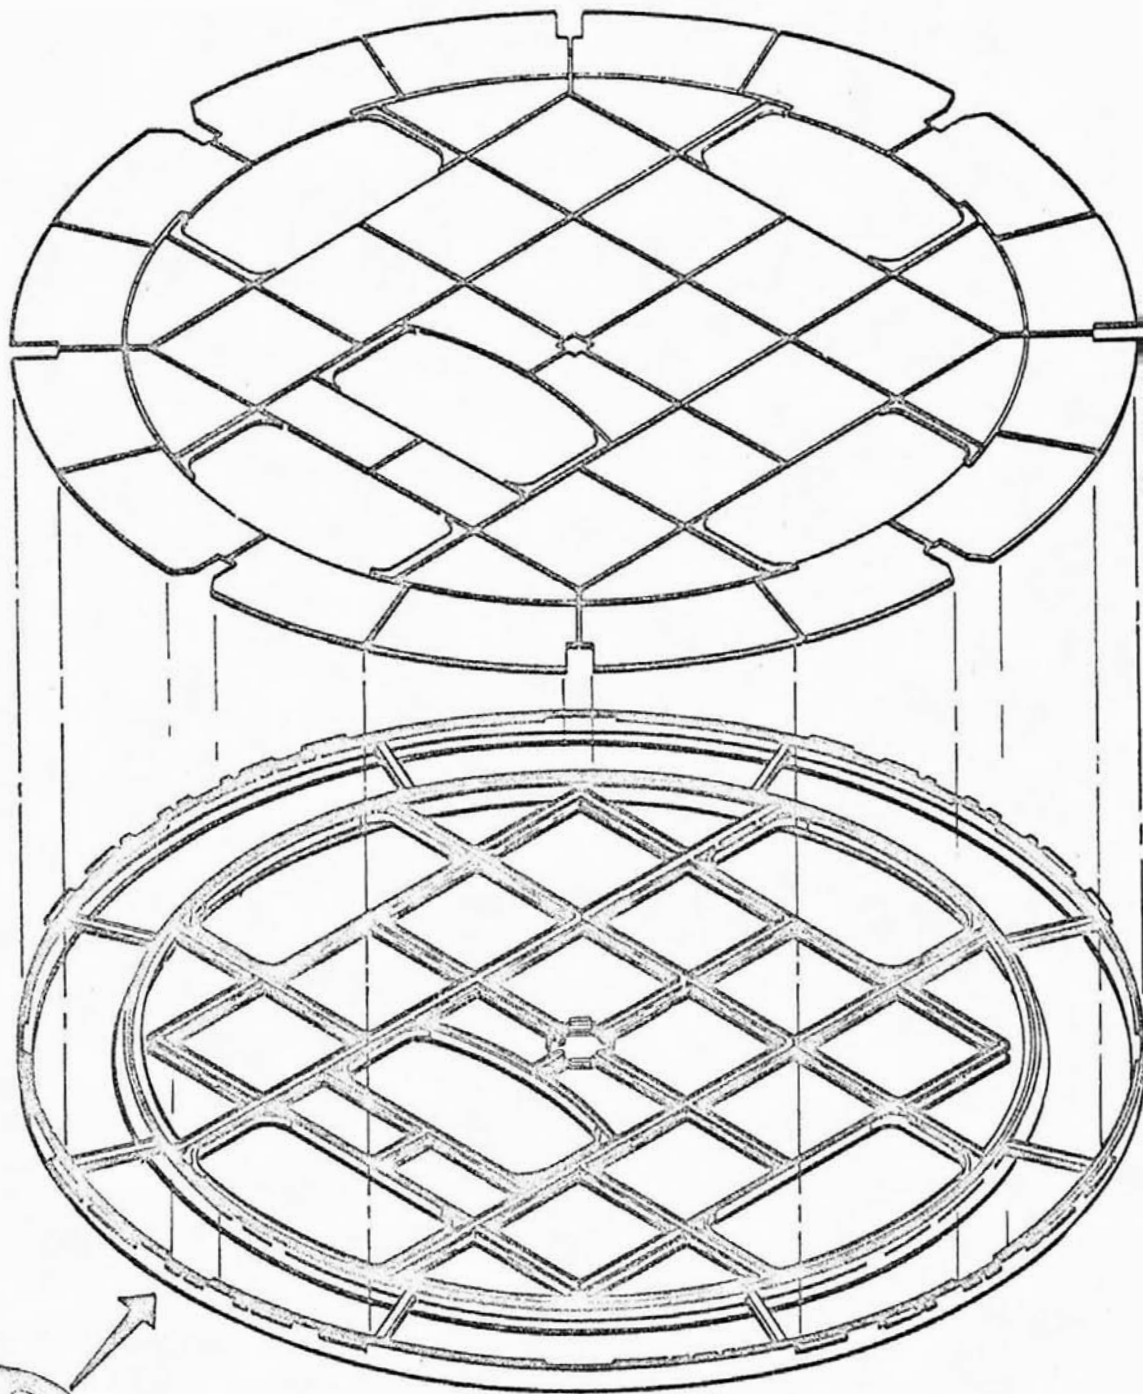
1. Base Heatshield Grid Structure and Base Heatshield Panels
